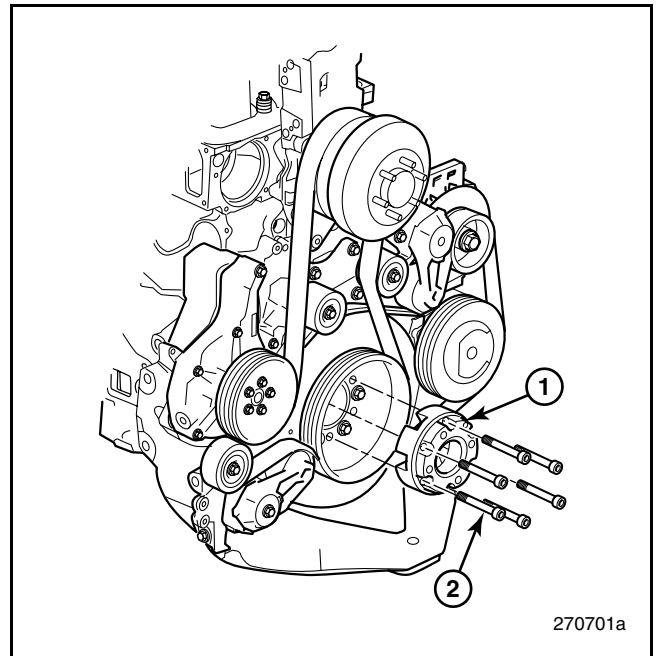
FEPTO Driveshaft Mounting Adapter (MACK MP7 Engines)
